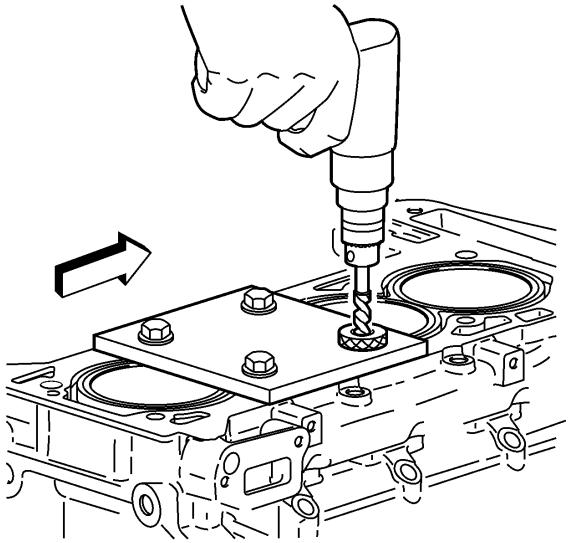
Drilling Out Threads Of Damaged Hole Courtesy of GENERAL MOTORS COMPANY
